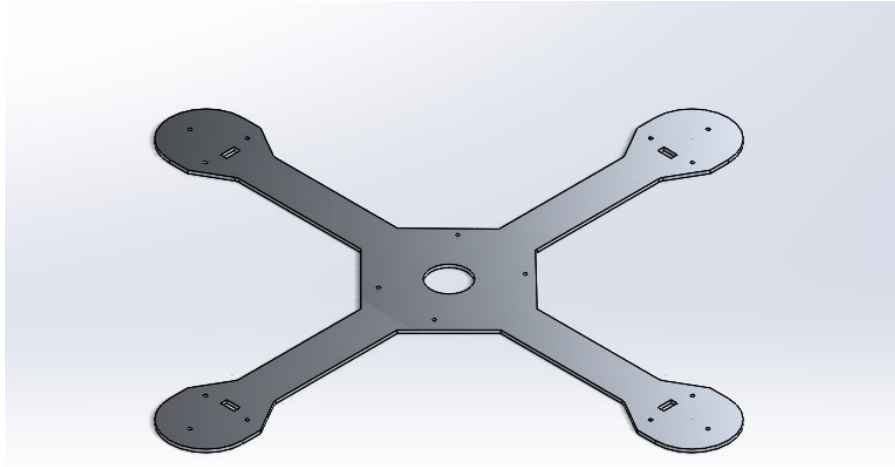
Aluminum 6061 Alloy Flat Sheet Design.
